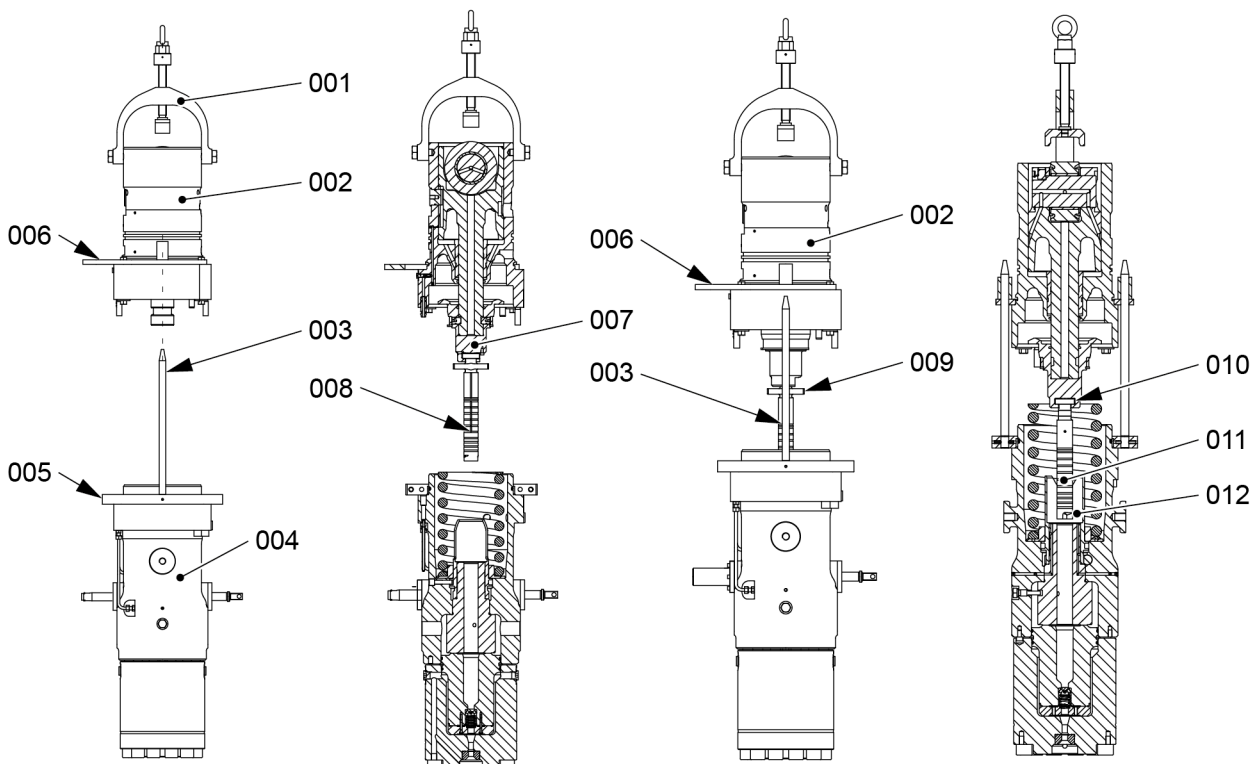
Fuel pump (X4) - Bottom housing assemble
